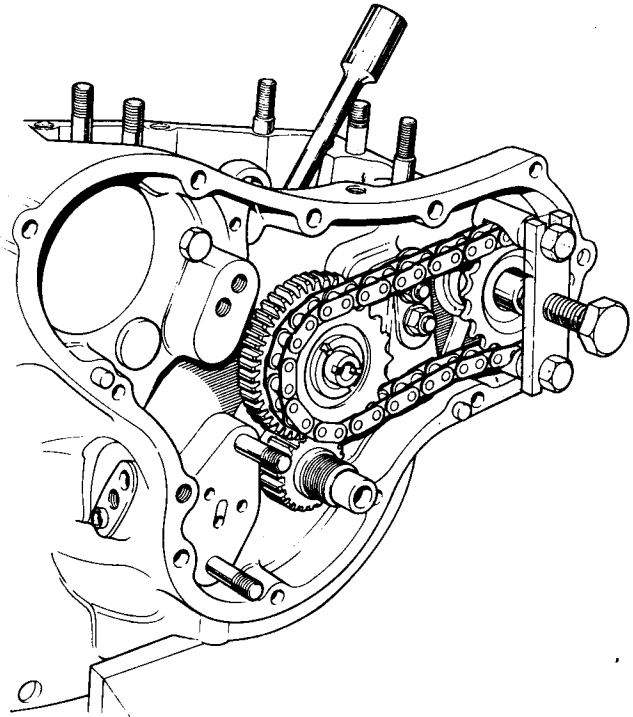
Releasing a tight camshaft using sprocket service tool 064297
